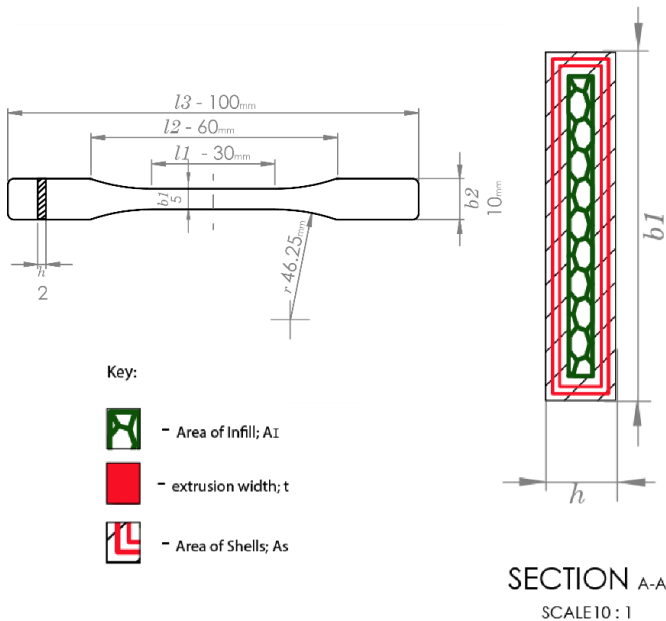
Cross Section Area of a Material Extruded Test Specimen
